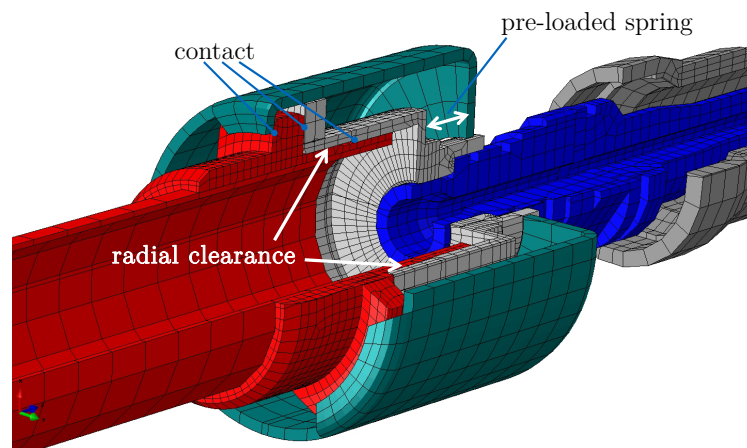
Sectional view of the FE-model of the force-locked chuck
